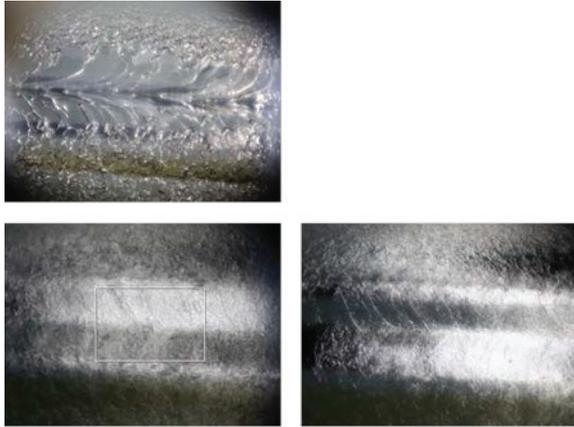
Optical inspection images of equator the weld seam on the RF surface; Cornell VEP (top), Ninja cathode type-I (bottom left), Ninja cathode type-II (bottom right).
